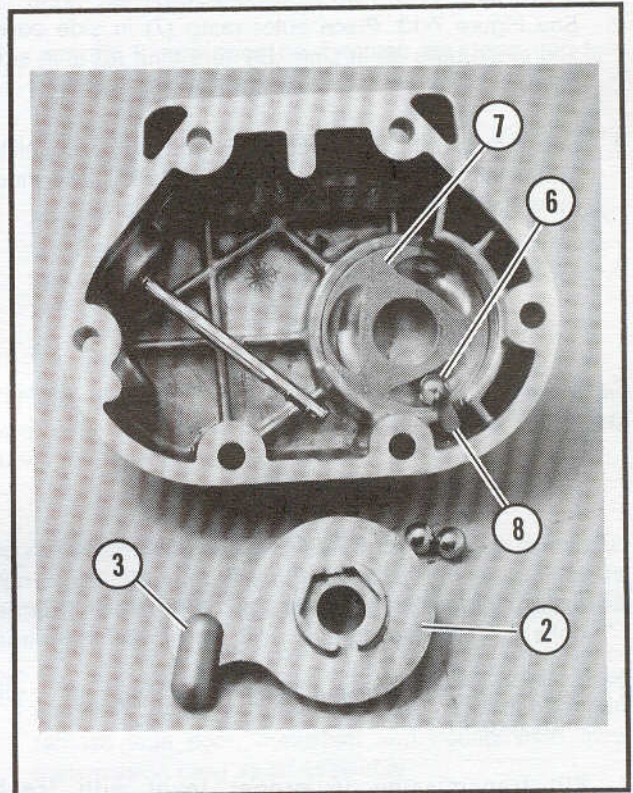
Ball and Ramp Mechanism With Inner Ramp and Coupling Removed
